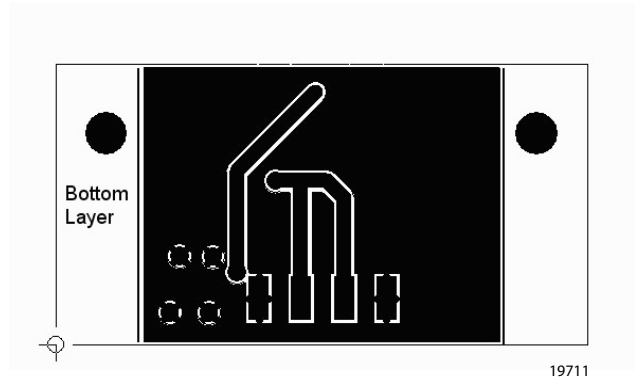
Board layout BOTTOM-Side. See from Top-Side.
